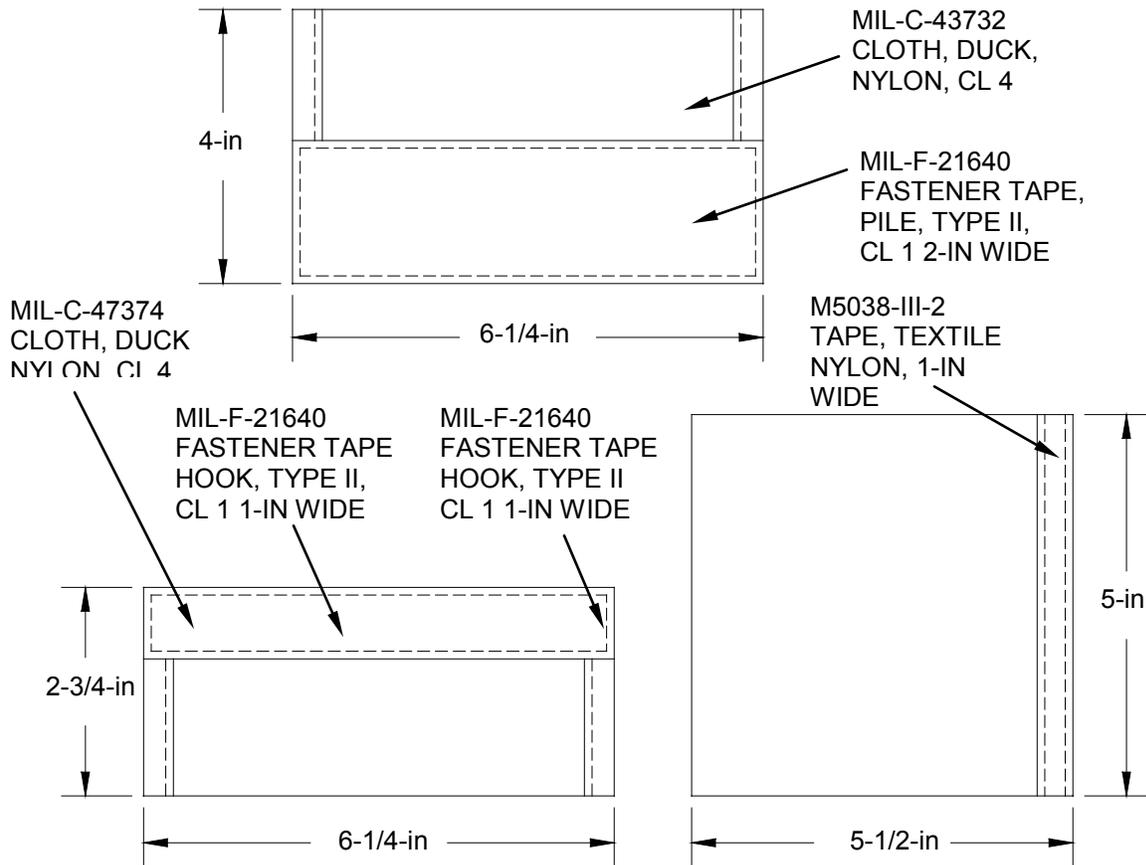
(CONTAINER FRONT MOUNTED) LOWERING LINE POCKET, FLAPS AND LOOP
